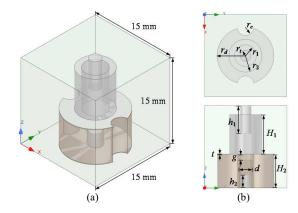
(a) Isometric view of the proposed MDC dual-mode resonator with outer dimensions; (b) top view and side view of the MDC dual-mode resonator with dimensional parameters.
